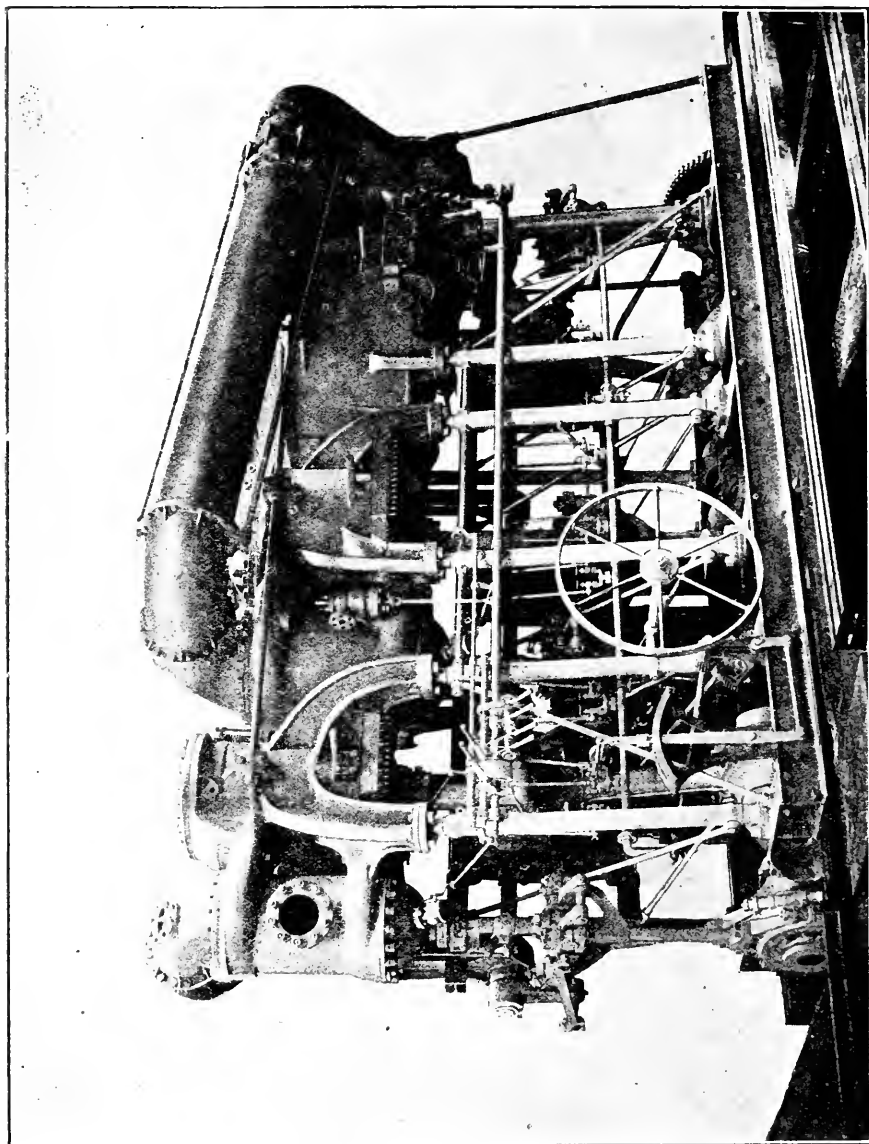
High-Speed Cruiser Engines. 7,500 I.H.P., Combined Cylinders 29 $\frac{1}{2}$ , 33, 54 inches diameter, 27 inches stroke, 220 revolutions.
